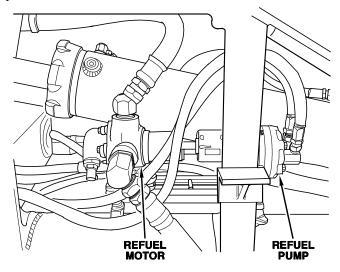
Refuel Motor and Pump Assembly—Installed View.
